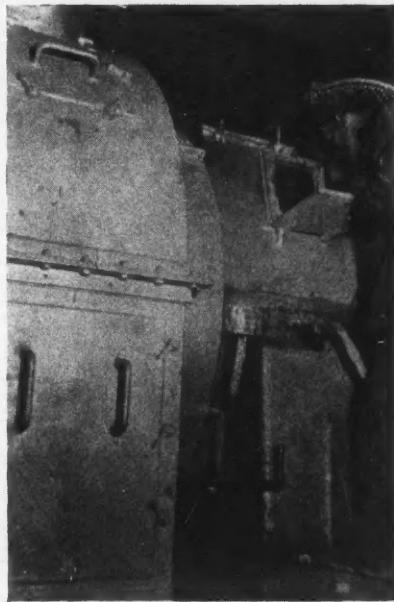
Outlet Trunnion and Door for Inspecting Bearings.
